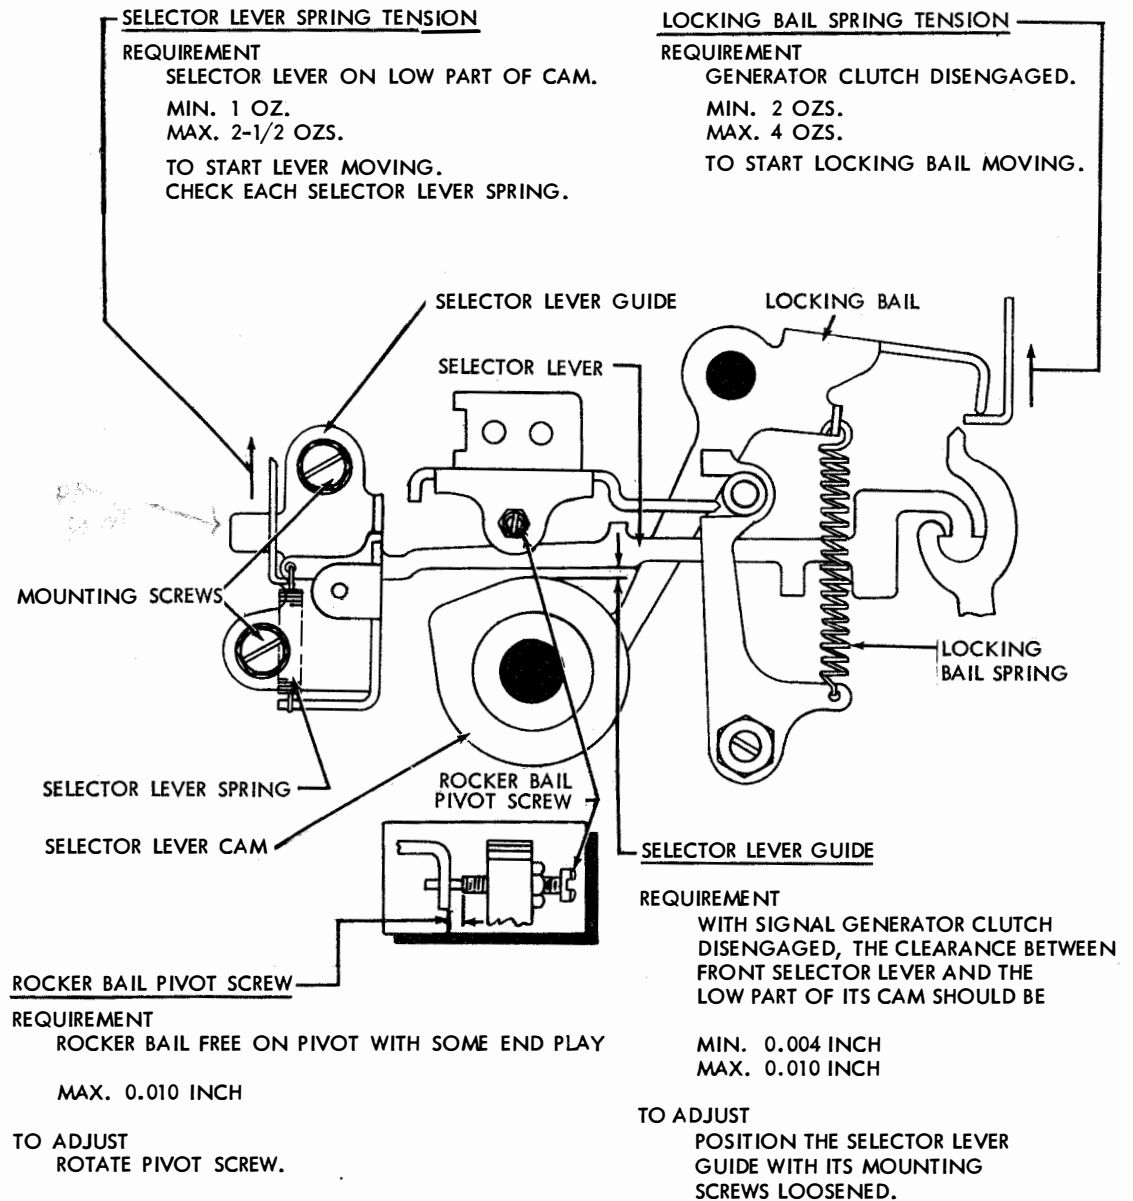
KEYBOARD, SIGNAL GENERATOR, FRONT VIEW
